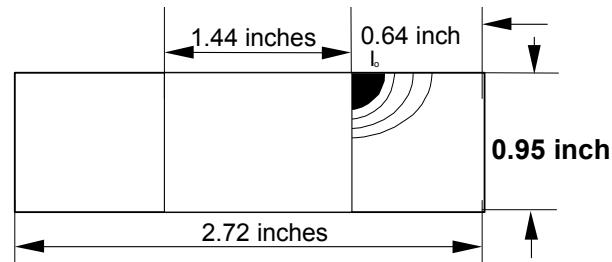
MAIN ROTOR SPINDLE SECTION A-A AFTER THEORETICAL REDESIGN
